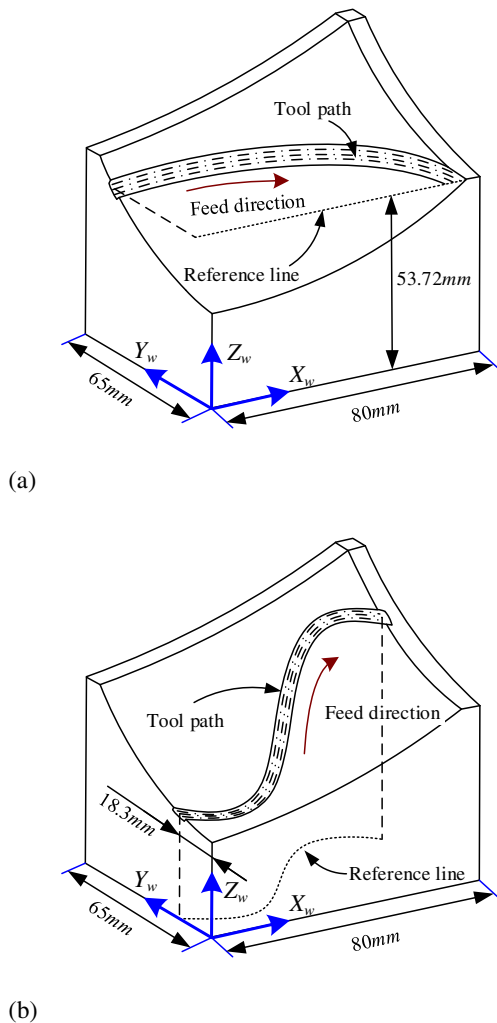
Schematic diagram of workpiece. a Z-constant tool path milling. b Sinusoidal tool path milling
